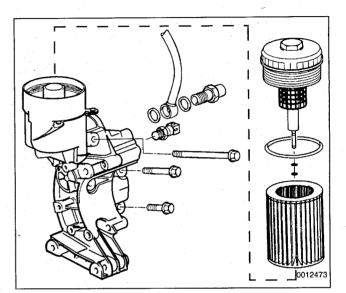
Oil filter housing on 6-cylinder engine. 4-cylinder engine is similar.
